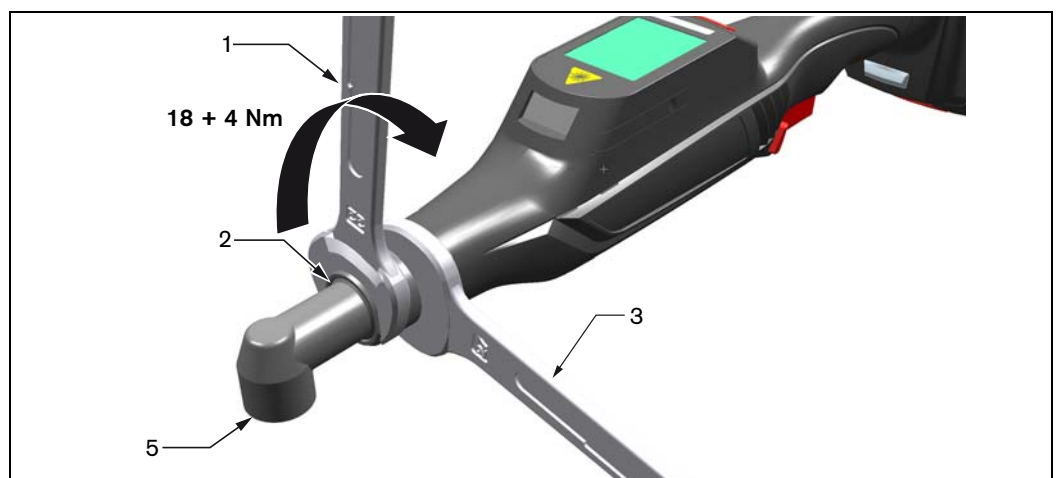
Adjusting the angle head and tightening the lock nut
